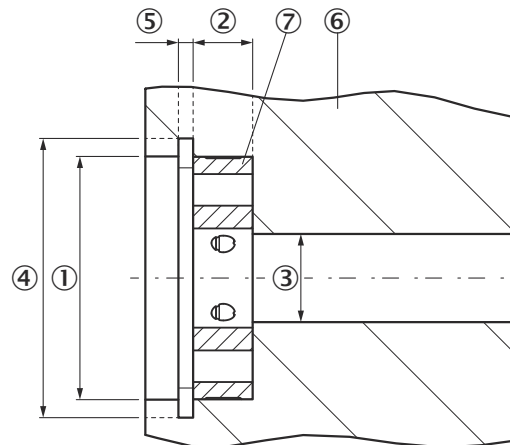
Preparation for ring magnet and C-magnet in piston rod with retaining ring in non-magnetizable material
